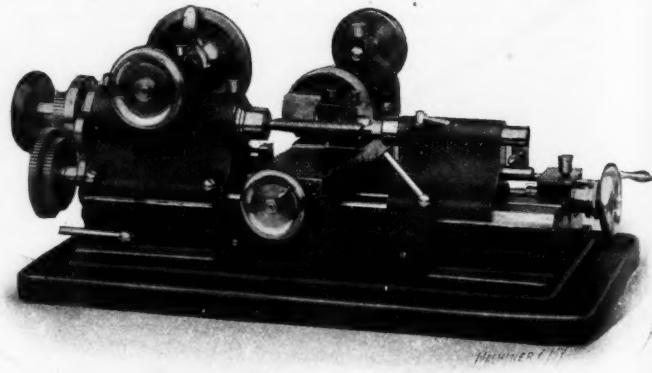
Thread Milling Machine for Small Precision Work, made by the Waltham Machine Works, Waltham, Mass.
